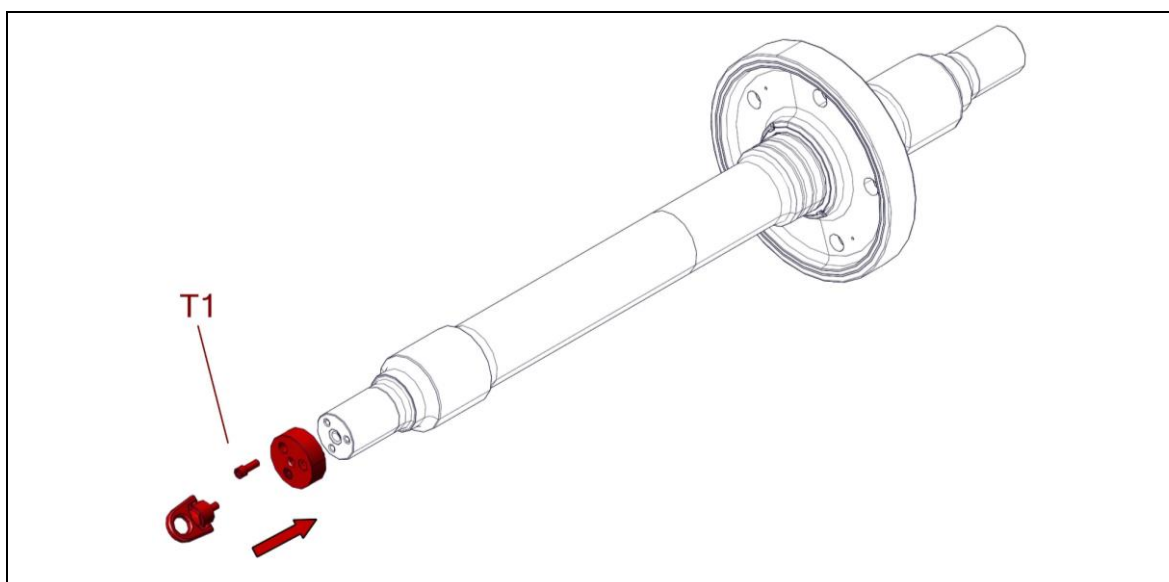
Installing shaft lifting device (part of T1) to the wheelset shaft
